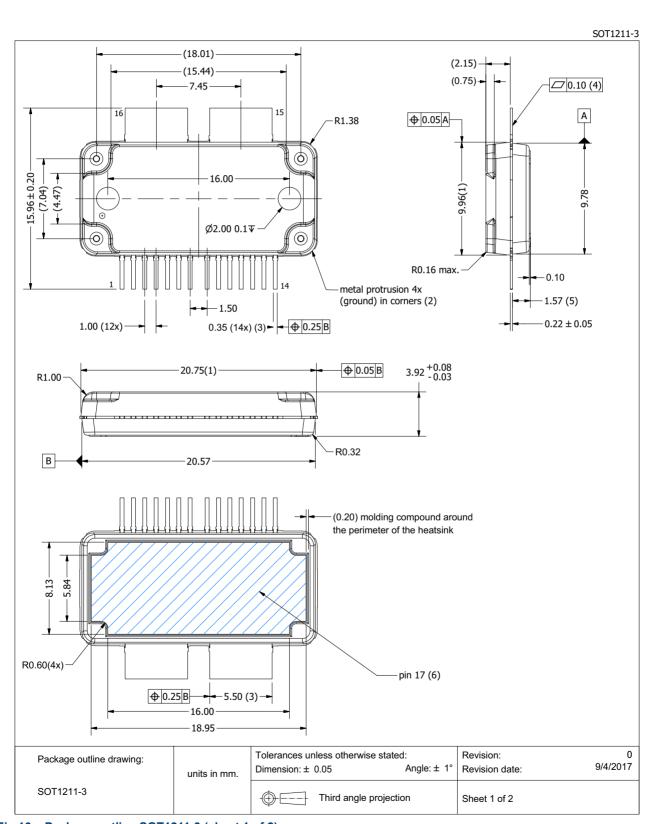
Package outline SOT1211-3 (sheet 1 of 2)
